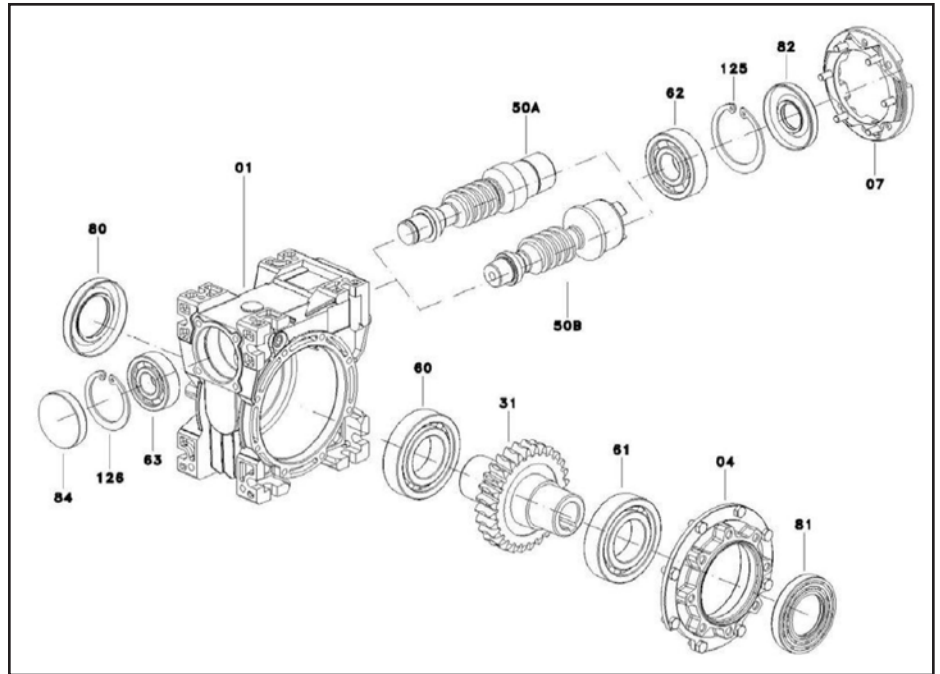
Typical worm gearbox components (Ref. 1)—aluminum housing; case-hardened steel worm with ZI profile; bronze wormgear molded on a cast iron shaft; four ball bearings with Seeger rings and oil seals; the lubricant is a synthetic PEG oil with viscosity grade 320 per AGMA 9005-E02 (Ref. 2)—tab B.5.
